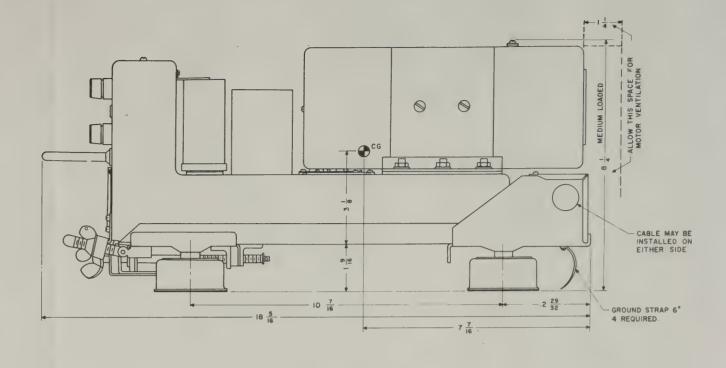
Outline and Mounting Dimensions, Radio Set Control CPC-1
